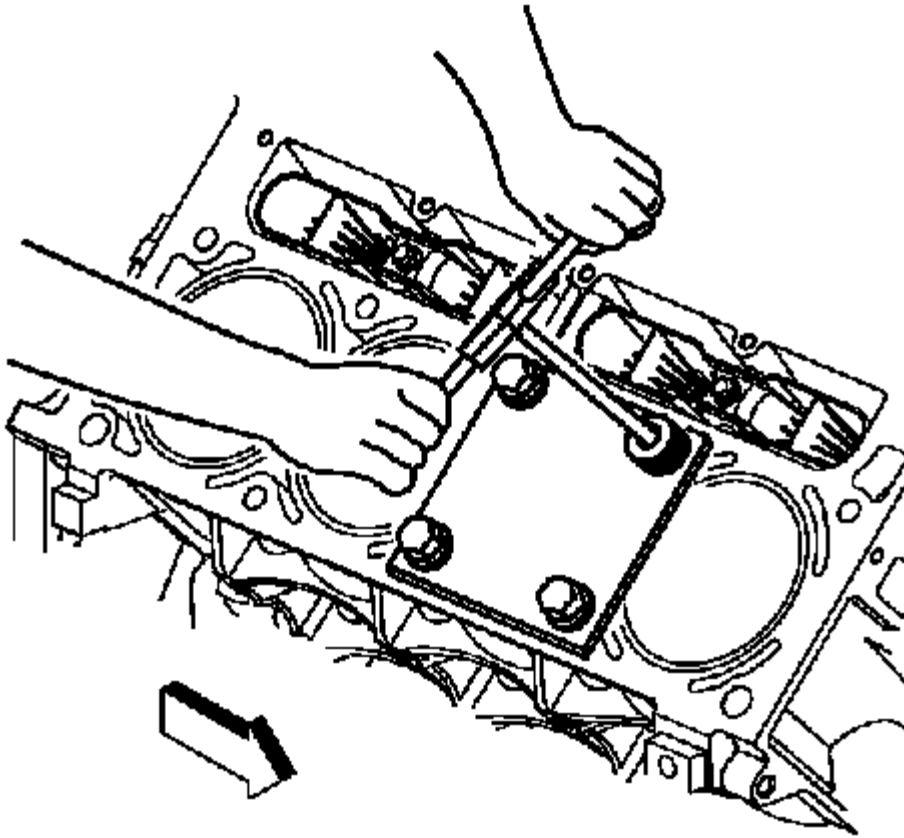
Drilling Cylinder Head Bolt Hole
